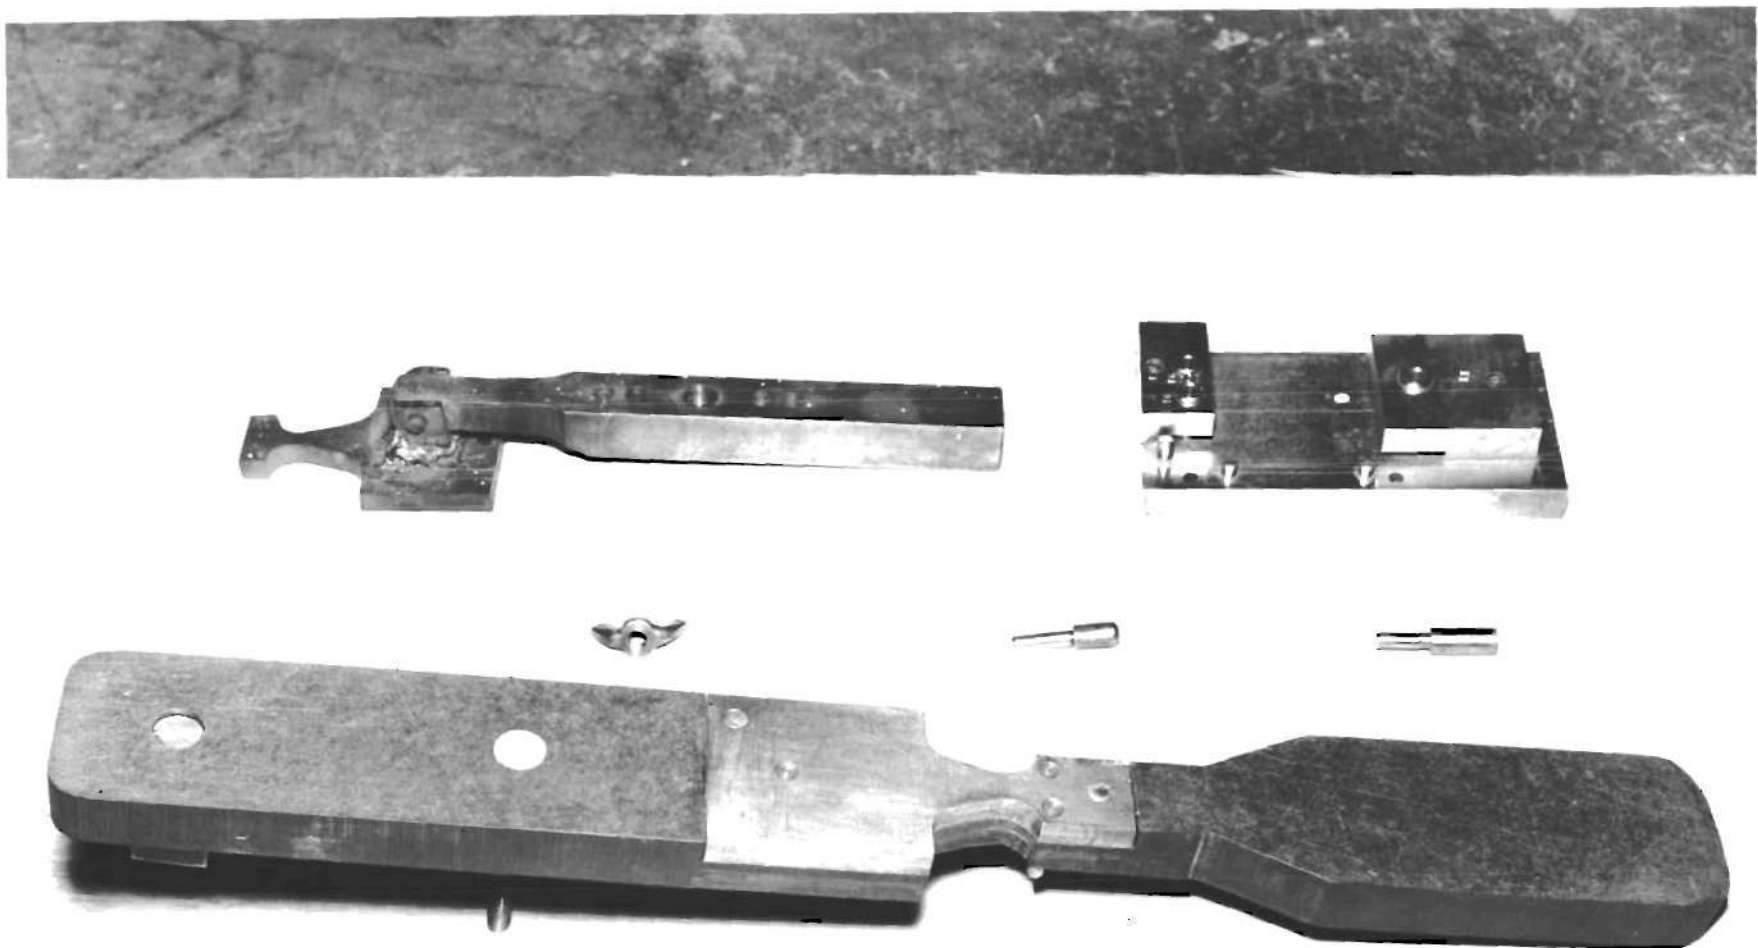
PHOTOGRAPH OF ROUTER JIG AND DRILL JIG.
